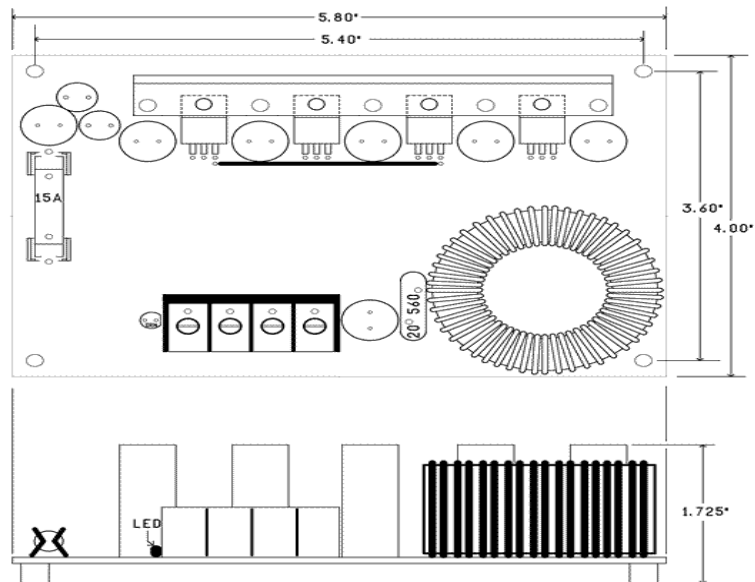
Top and Side View Dimensions of DC-DC Boost-converter
